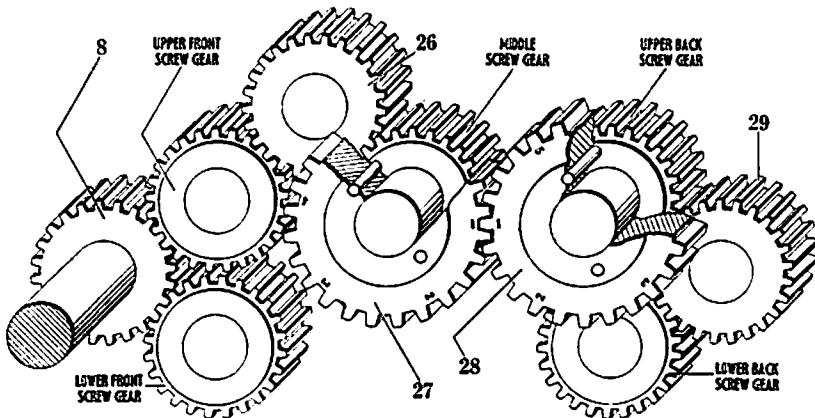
Double Distributor Screw Gears. The distributor clutch shaft gear 8 imparts movement to the gear assembly. The clutch shaft gear turns the upper and lower front screw gears. The upper front gear transmits motion to the middle screw gear through idle gear 26. The back distributor screws are driven by gears 27 and 28. Gear 28 turns upper back gear, which likewise transmits motion to the lower back screw gear through the idle gear 29.
